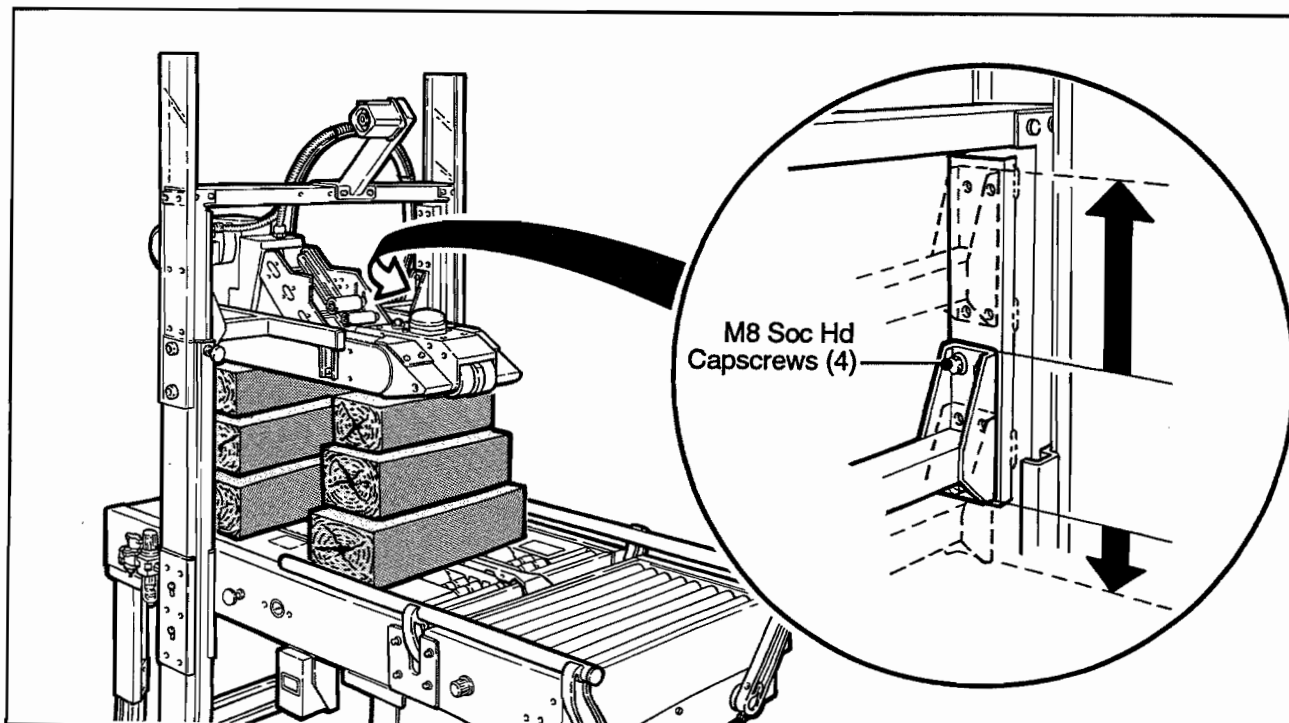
Upper Taping Head Frame, Re-Positioning
